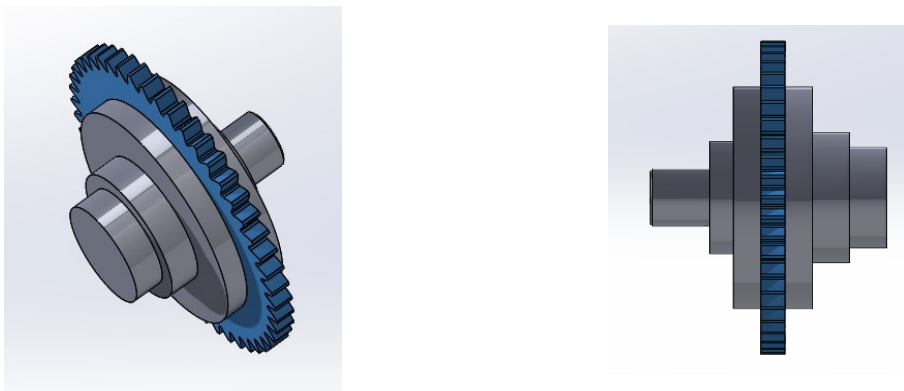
The gear mounted on the shaft and clamped by two mounting rings
